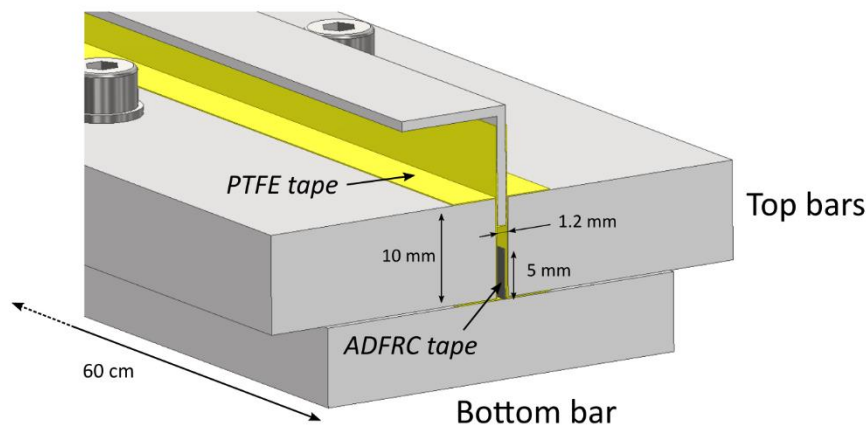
Detail of semi-closed mould set-up for manufacturing near square filament sections.
